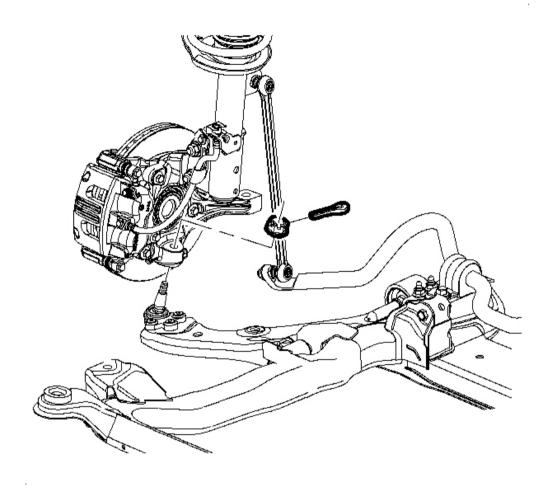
Lower Ball Joint Cotter Pin, Ball Stud & Nut Courtesy of GENERAL MOTORS CORP.
